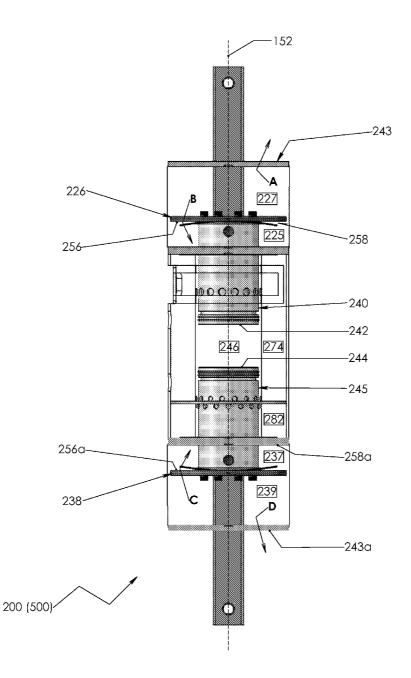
A. SIDE, CROSS-SECTIONAL VIEW OF COMBUSTION ASSEMBLY DURING ENGINE CYCLE
